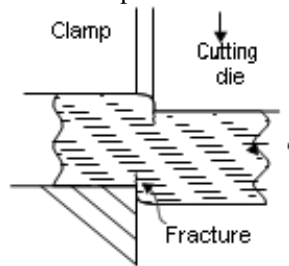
Magnified section of blanking a sheet showing plastic deformation and cracking
